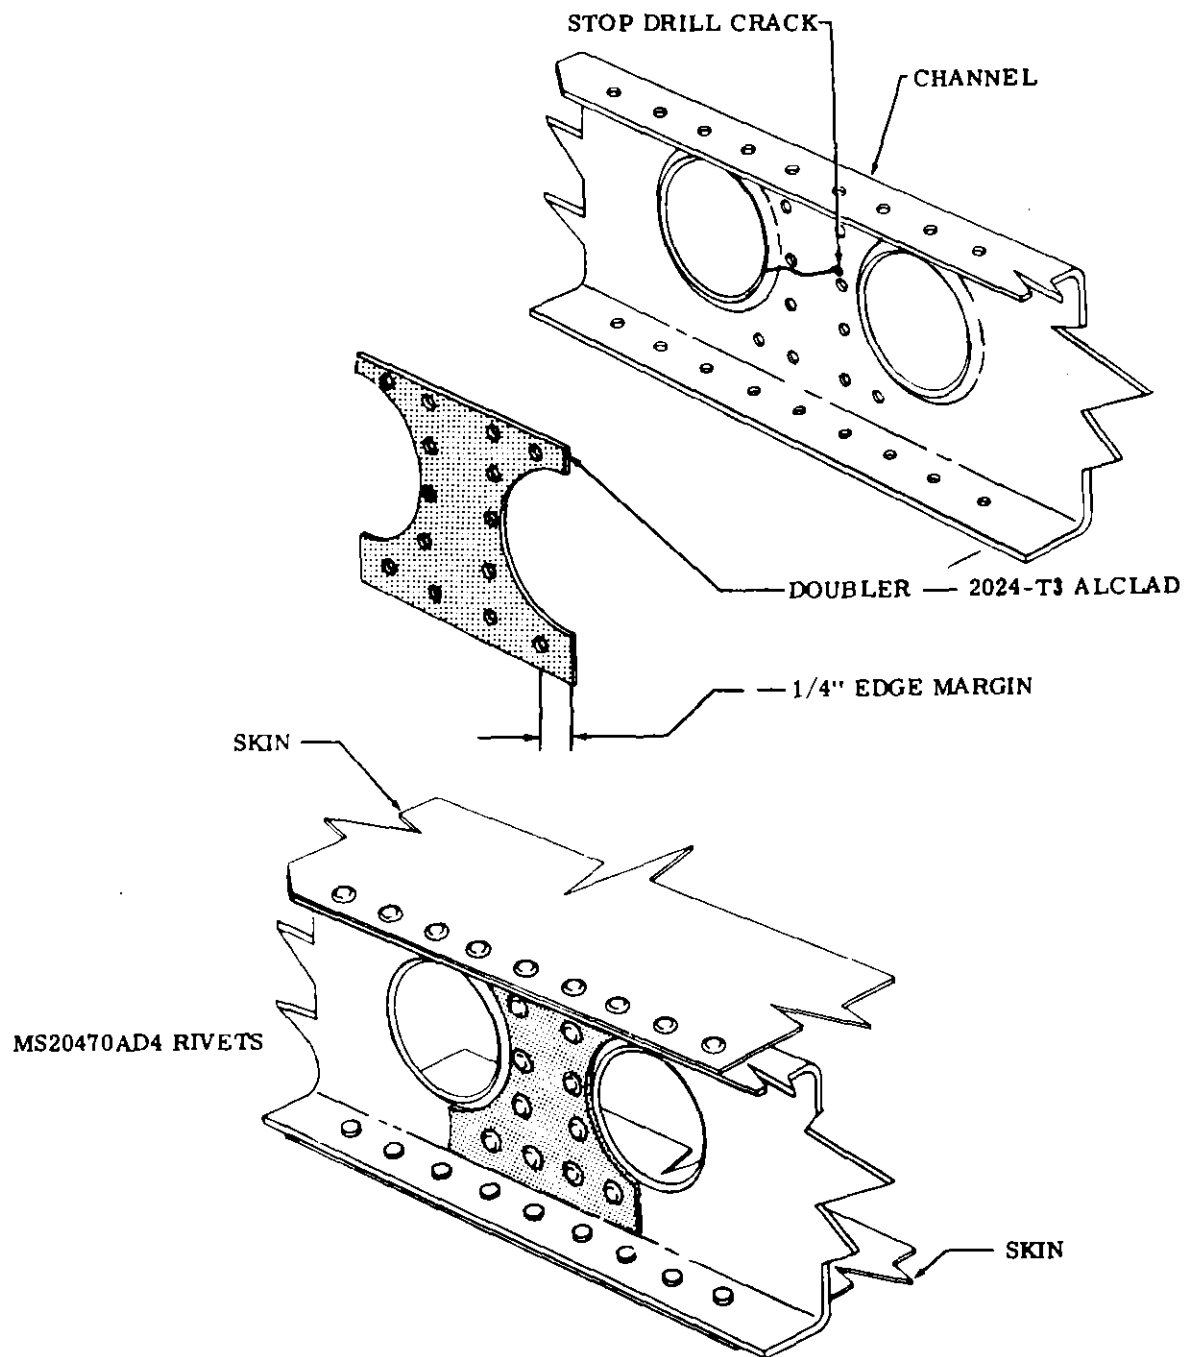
Stringer and Channel Repair (Sheet 3 of 4)
